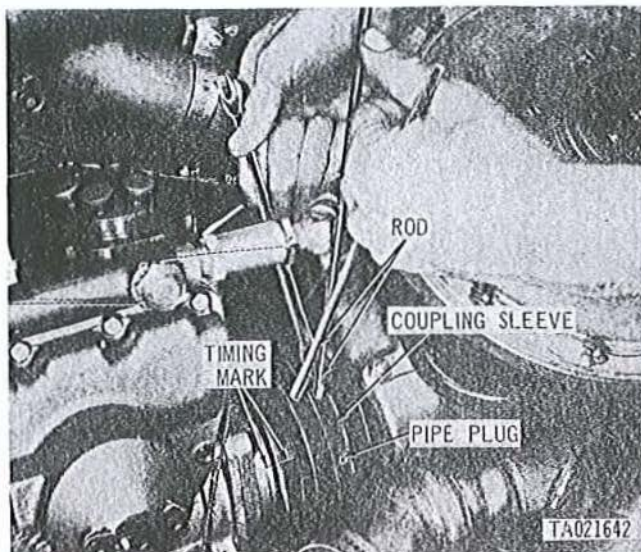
Removing fuel injection pump drive gear train backlash.
